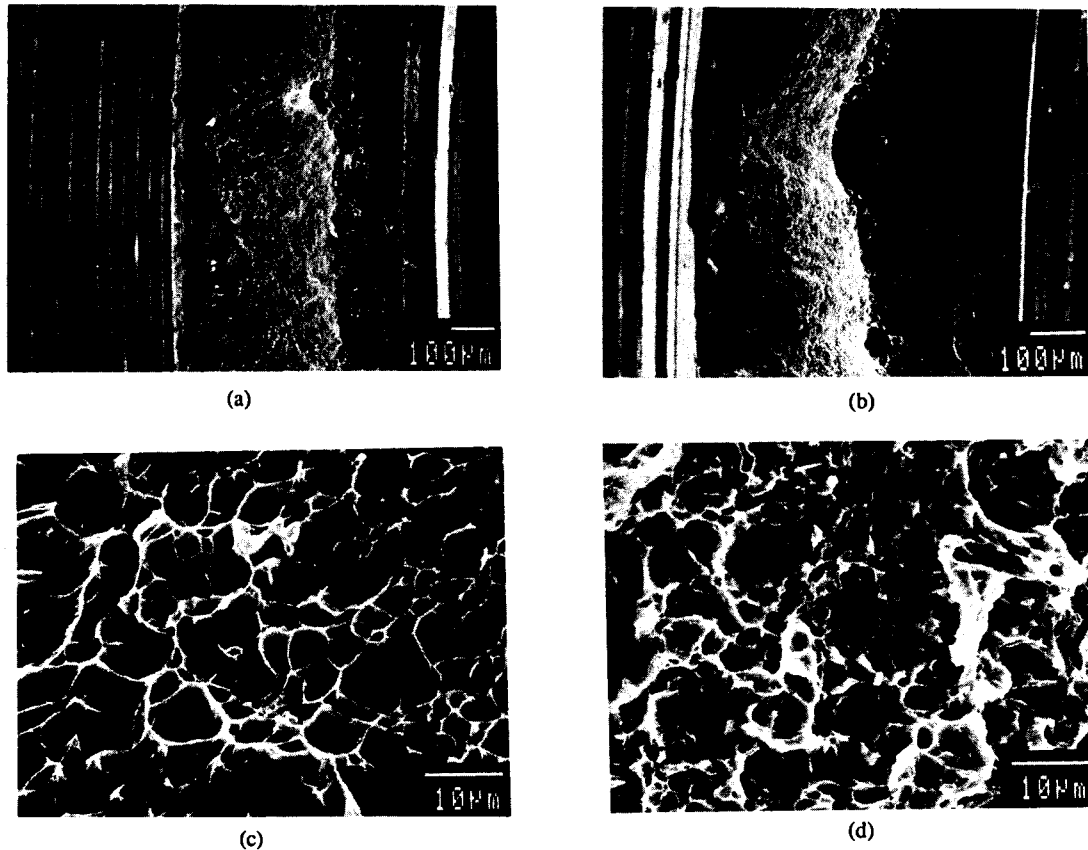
SEM photographs showing weld joints failed at weld interface by (a) tensile, (b) burst tests and fracture surfaces by (c) tensile, (d) burst tests.
